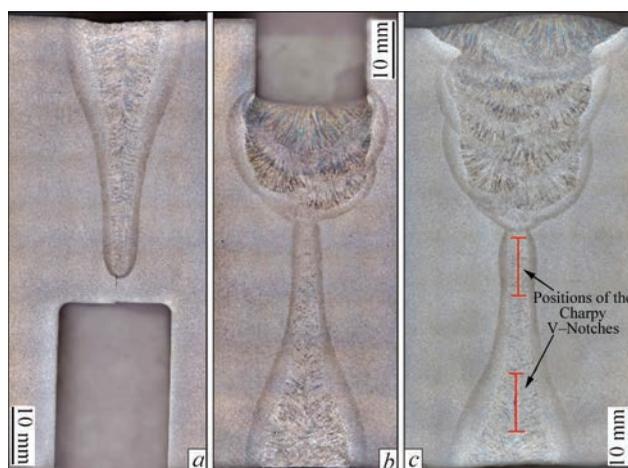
Macro sections of the 80 mm thick weld produced using the combined HLAW and NG-SAW process: *a* — HLAW weld from the first step; *b* — deposition of the NG-SAW fill passes in the U-groove; *c* — completed joint with indicated positions of the Charpy V-notch specimens
